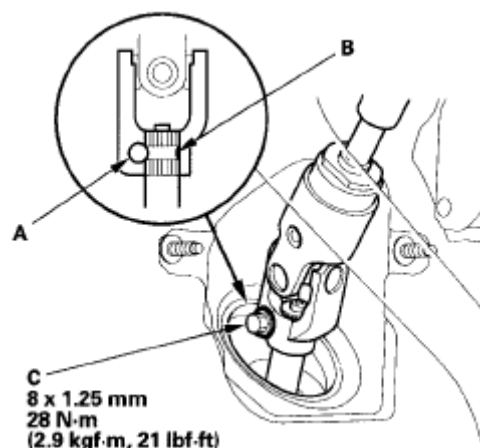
Aligning Bolt Hole On Steering Joint (With Torque Specifications)
